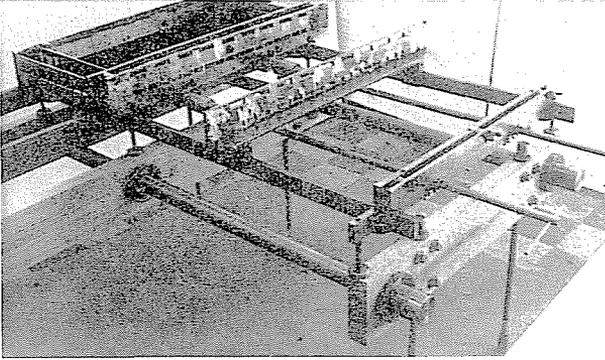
The "mould"*. The mould of the basic elements is surrounded by four plates: 1. fixed cross-comb; 2. mobile longitudinal combs (both are double, in order to help drawing the keys out of the mould without deviation); 3. a removable longitudinal plate, and 4. a removable butt end. The bottom of the mould is a removable, smooth hard vinyl plate.
